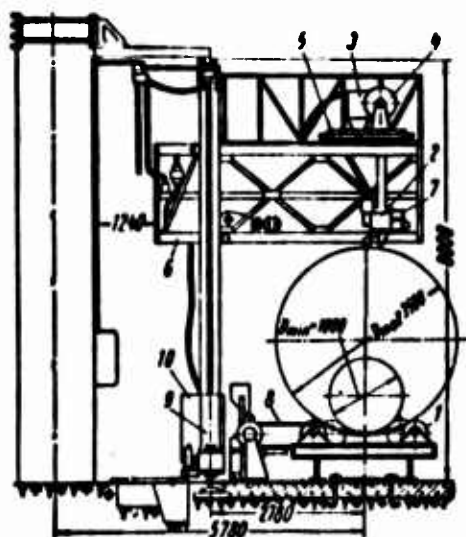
Constructive diagram of installation for automatic welding under flux; 1 - roller-support; 2 - welding head; 3 - bunker for flux; 4 - coil for wire; 5 - cart with turning table; 6 - lifting platform; 7 - control panel; 8 - fluxing pad; 9 - bicycle cart; 10 - point of power supply.
